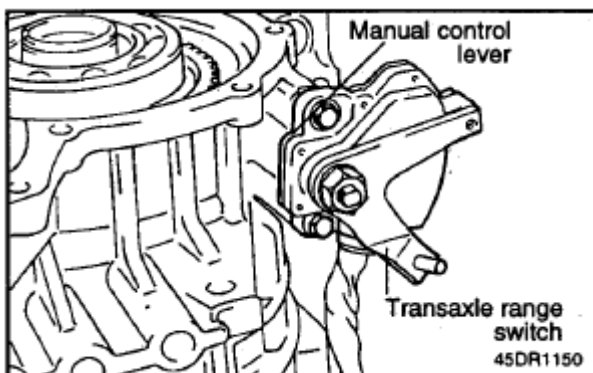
Identifying Transaxle Range Switch & Manual Lever
